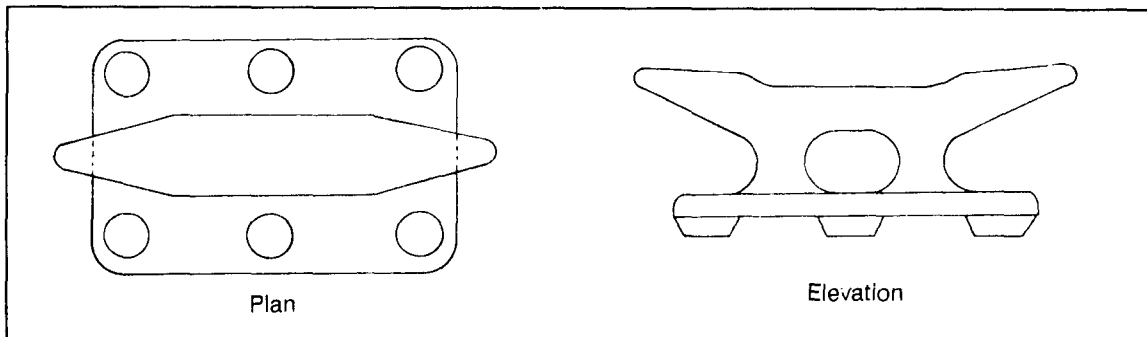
Plan and Elevation Views of an Open Wide-Base Cleat
